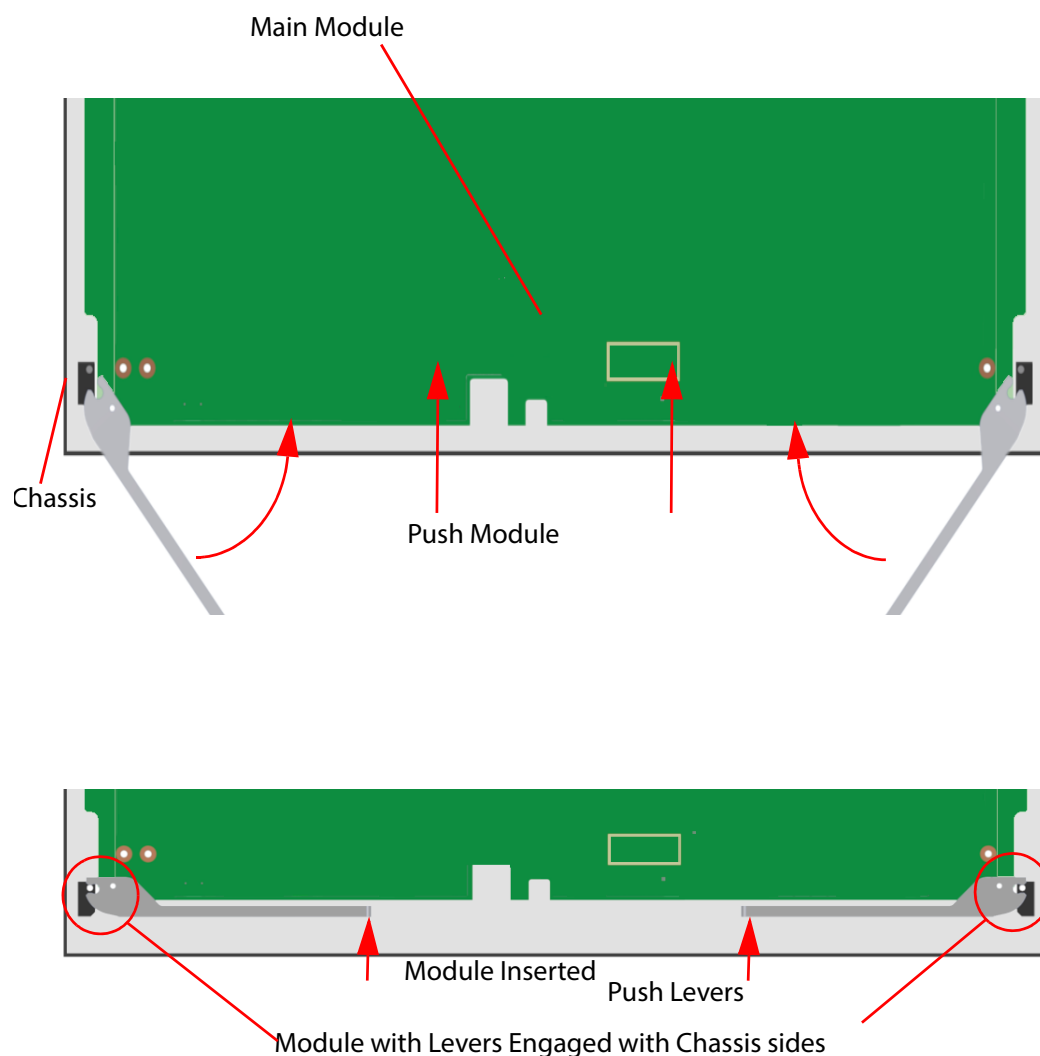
Inserting MV-821 Multiviewer Main Front Module
